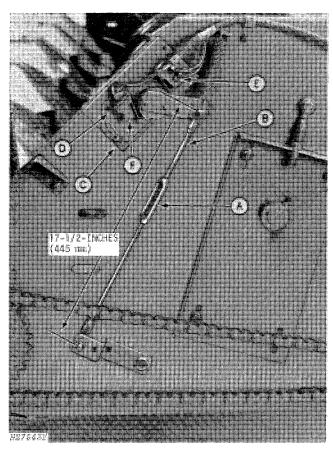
Adjusting Height Sensing Switches (Left-Hand Outer Gatherer Sheet Removed for Illustrative Purposes)
